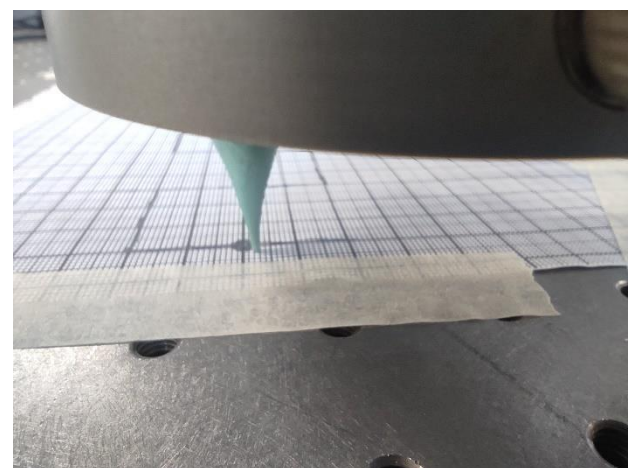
Custom tool that screws into one of the threads of the *UR3e* robot's tool flange
